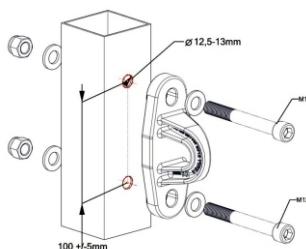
Installation of bolt fasteners with anchor point on steel structure
